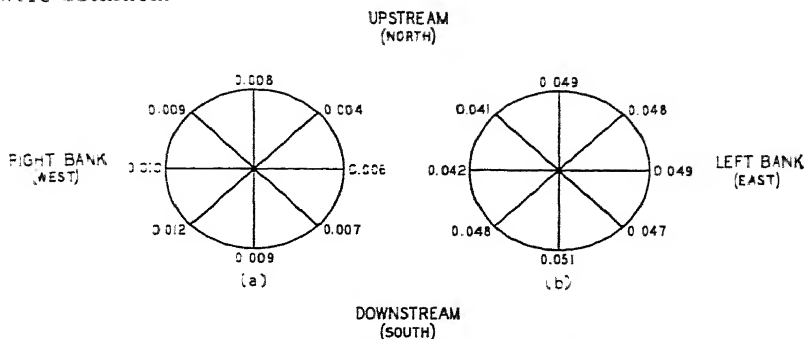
Clearances in inches between guide bearing and shaft—west unit.
